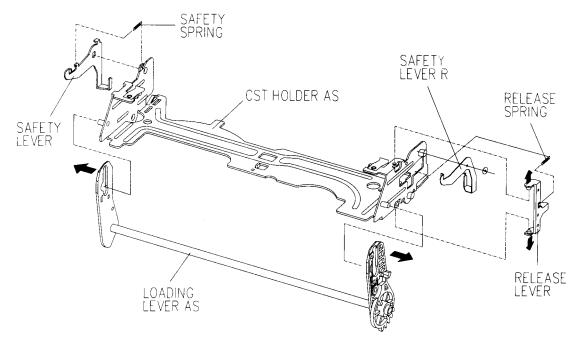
DISASSEMBLY OF THE CASSETTE HOLDER ASS'Y
